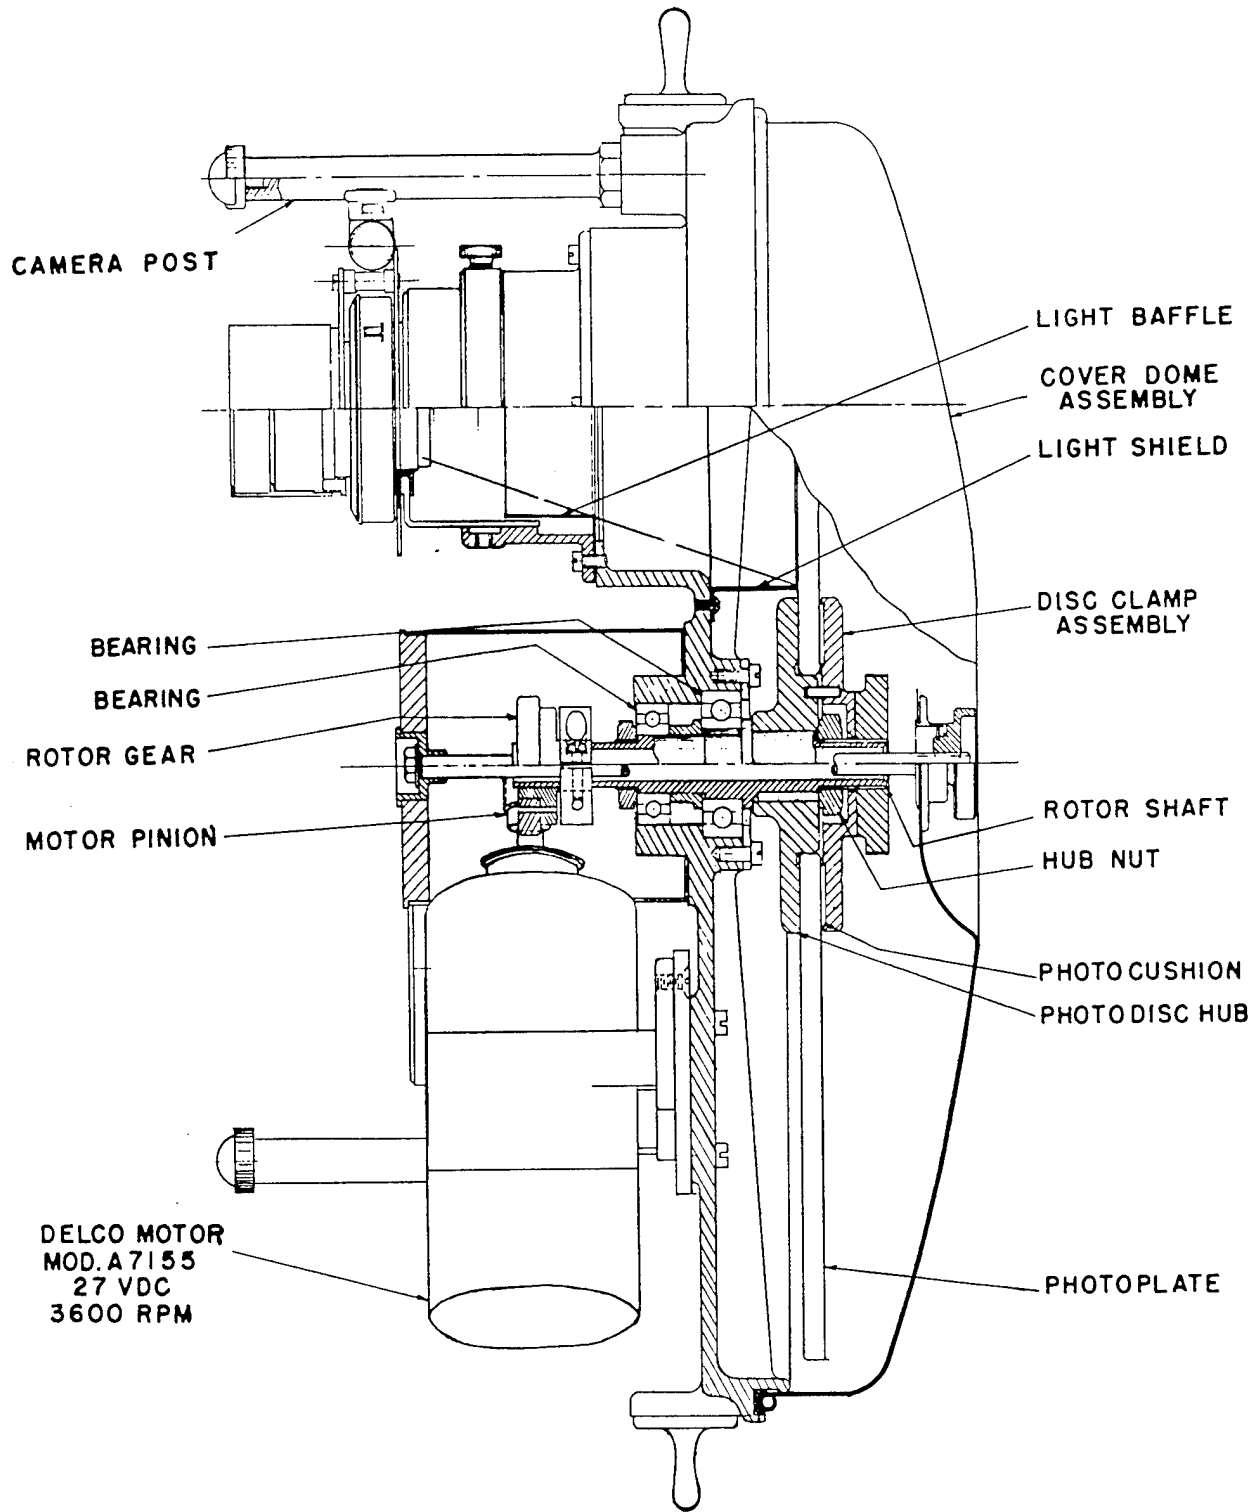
Detailed Diagrammatic View of Disc Camera Body Assembly
